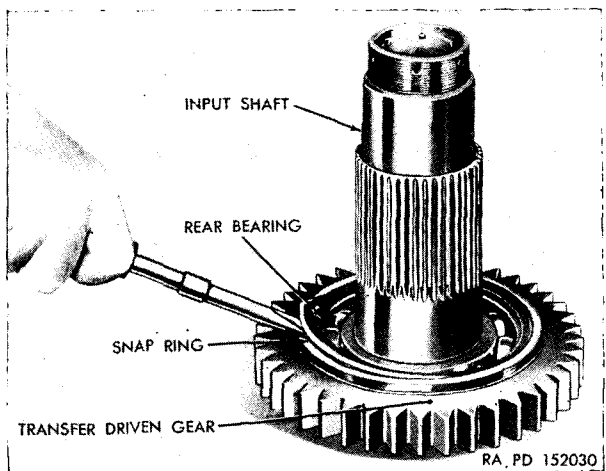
Removing or installing converter-output transfer-driven-gear snap ring.
